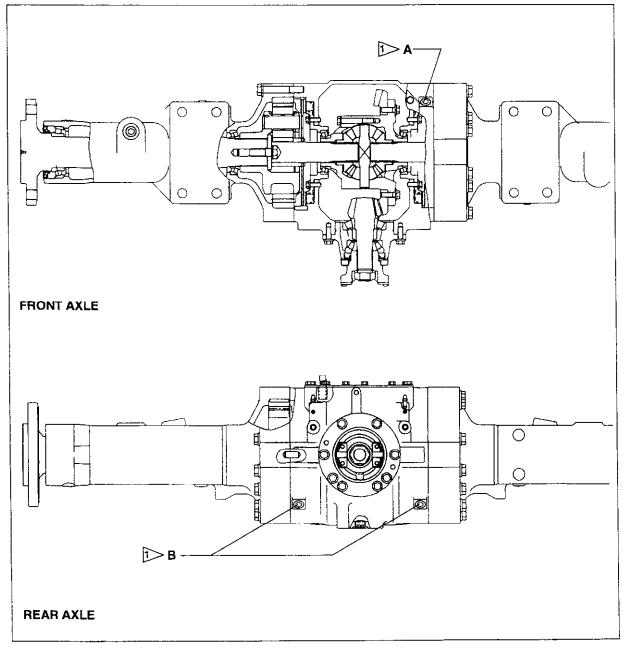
Brake oil bleed screw (S) locations on the axle (1 per brake)
